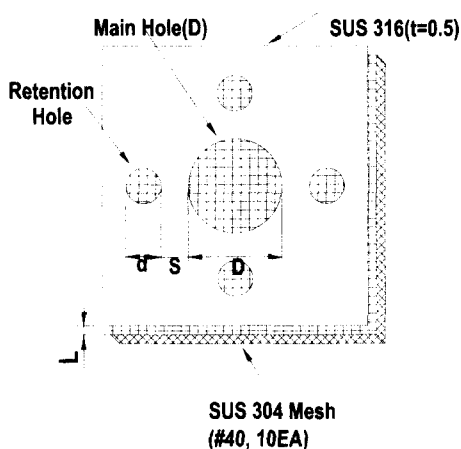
Schematic of burner structure of sheet multi-holes burner
